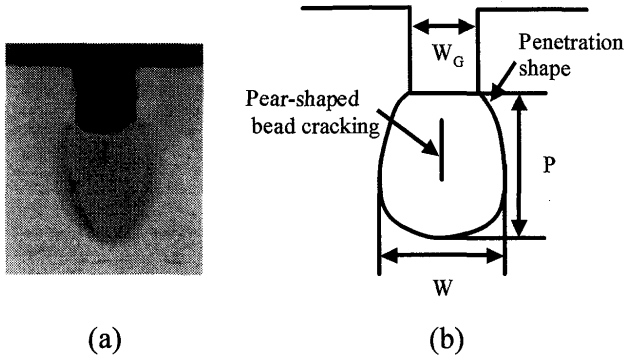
Photo and geometrical parameters of pear-shaped bead cracking.
